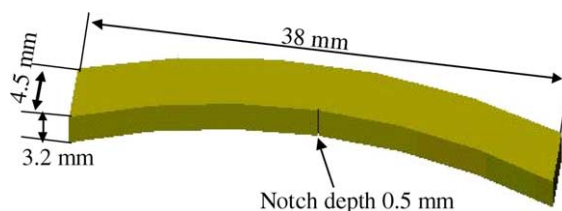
Schematic diagram of the cantilever beam (CB) specimens taken from a CANDU Zr–2.5Nb tube.
